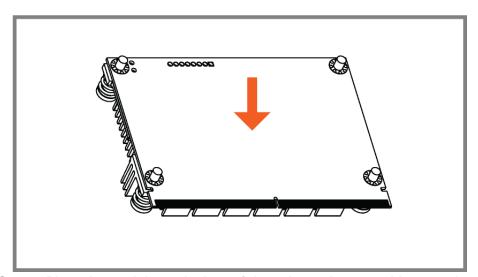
Step4 - Place the module on the heat sink, and turn the assembly around.
